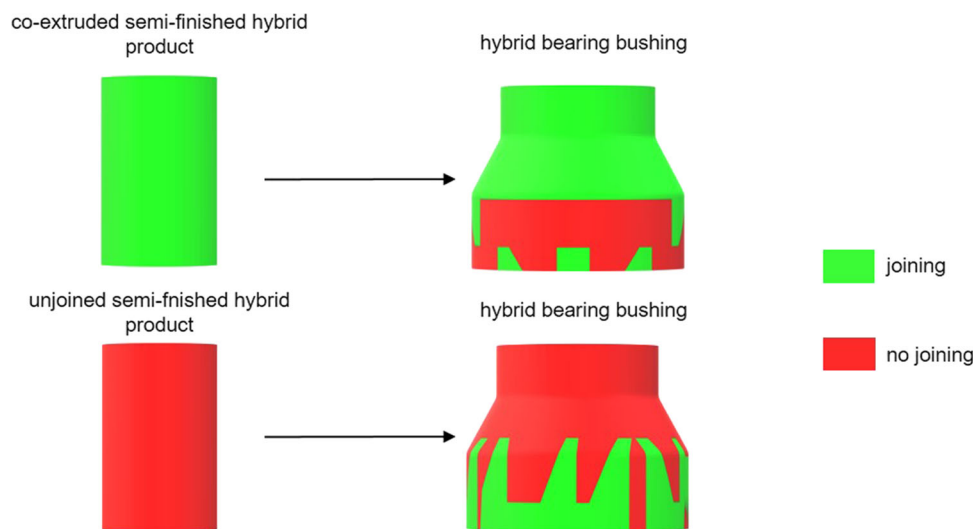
Ultrasonic testing results for bearing bushings (a) extruded and then die-forged and (b) for unjoined steel and aluminum tubes with subsequent die forging
